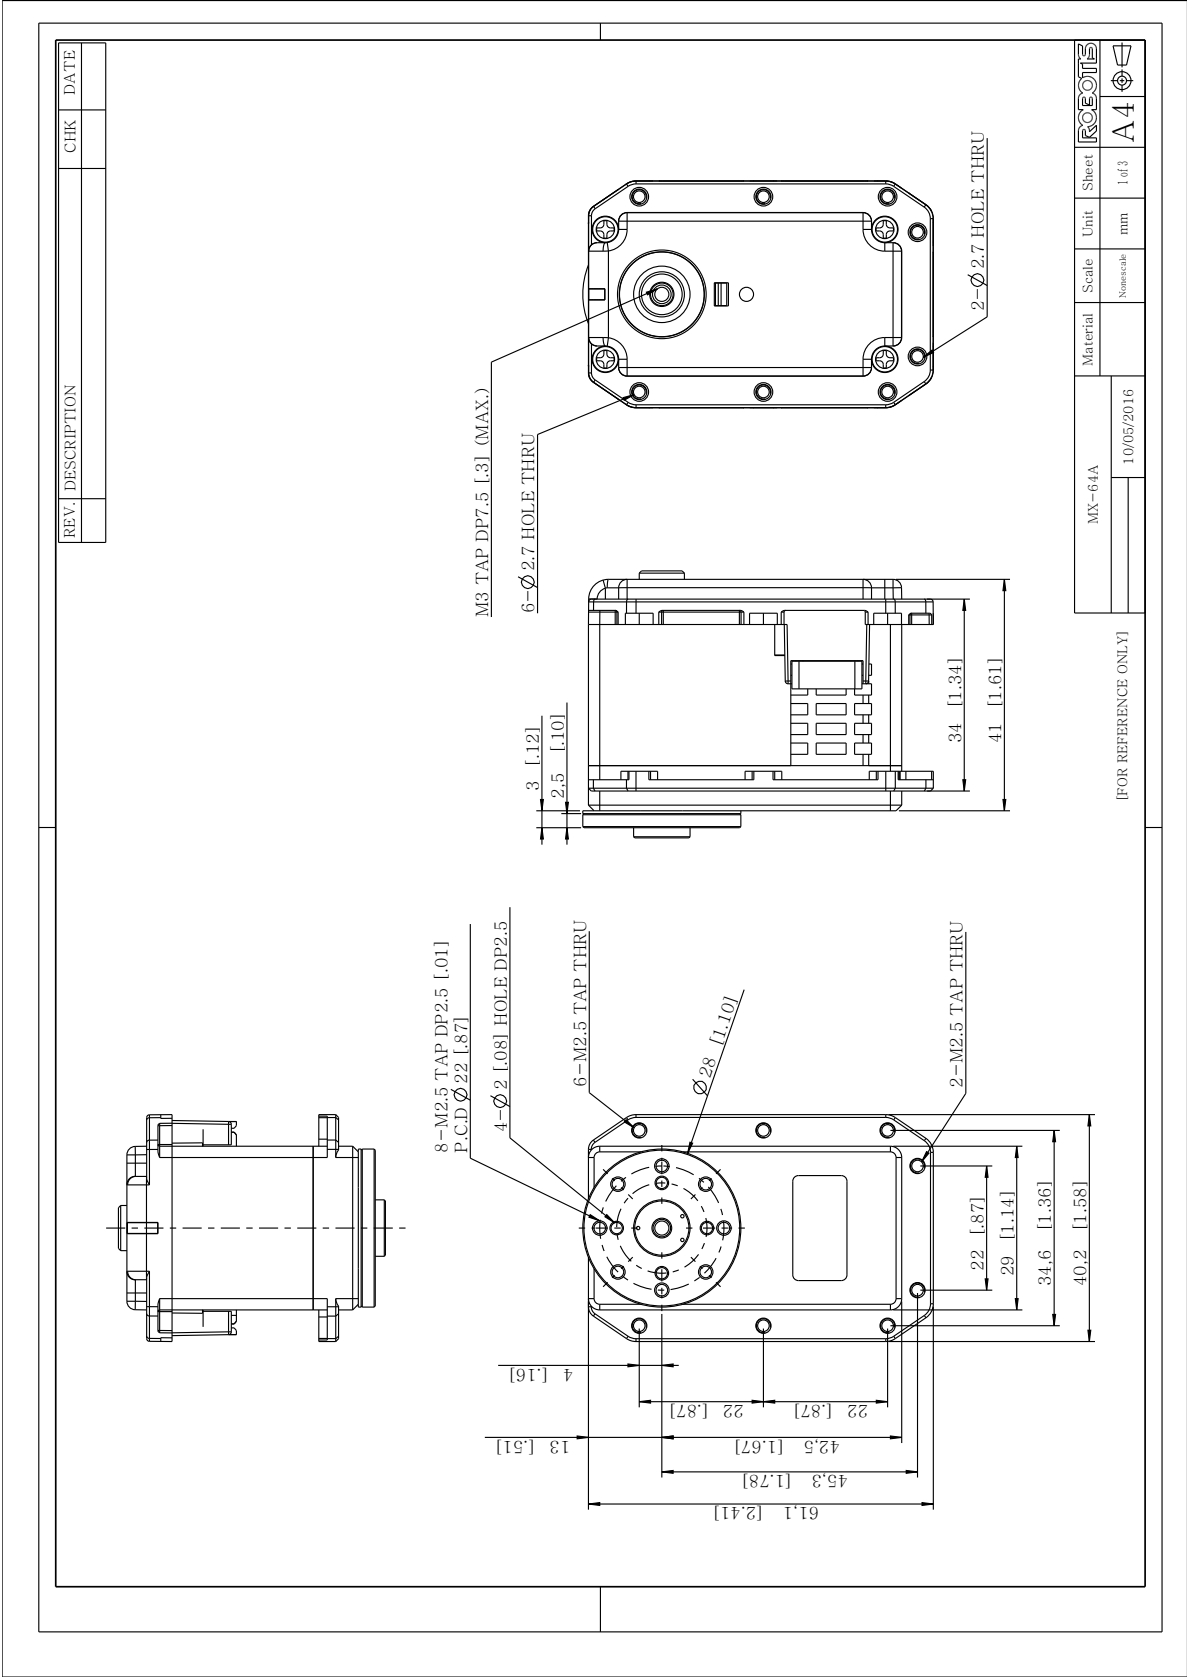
Technical drawing of dynamixel motors MX-64A.
